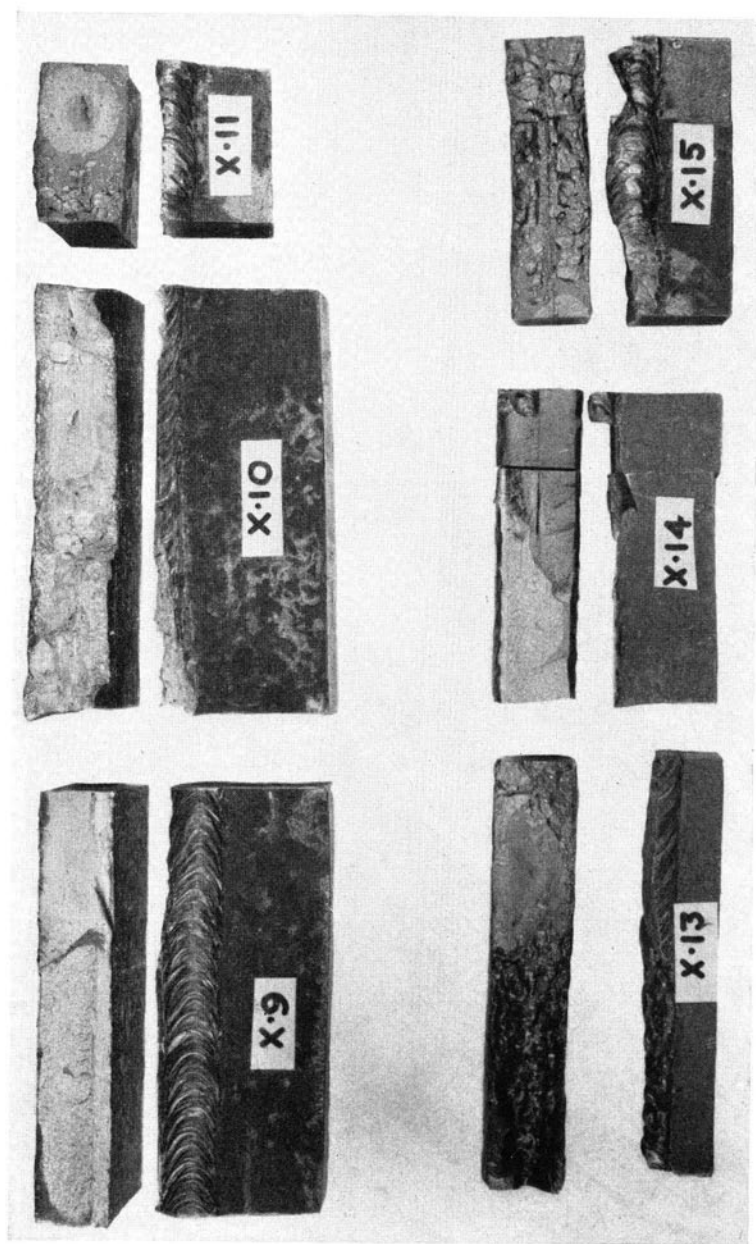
(b). FRACTURES OF THE X SPECIMENS
